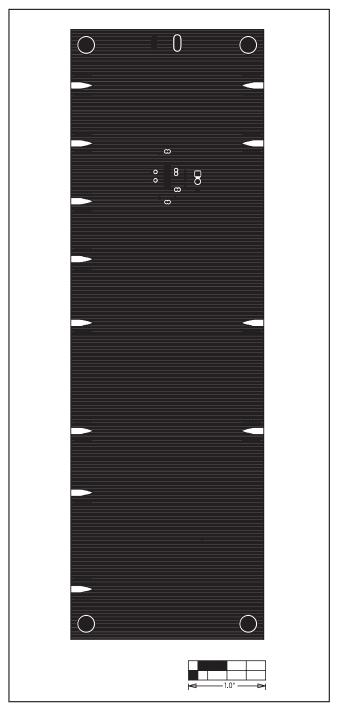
MAX4889B EV Kit PCB Layout—Inner Layer 2
